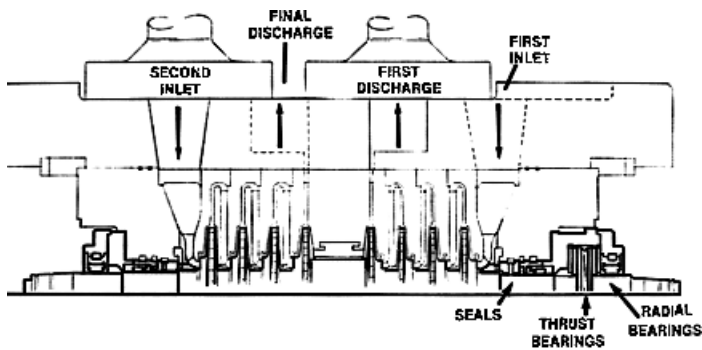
Back-to-back impeller orientation. (*Dresser-Rand Company, Olean, N.Y.*)
